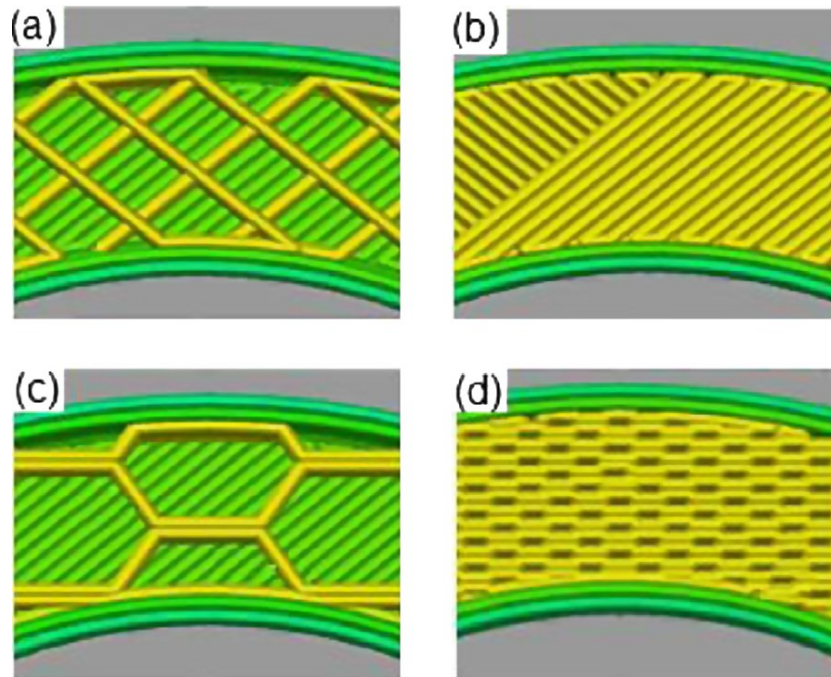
Horizontal Cross-Section of Transformer Cores Modeled on FDM Printer with Different Fill Pattern and Fill Percent. (a) Rectangular Fill Pattern with 20%, (b) Rectangular Fill Pattern 100% Fill, (c) Honeycomb Fill Pattern with 20% Fill, (d) Honeycomb Fill Pattern with 100% Fill [86]
